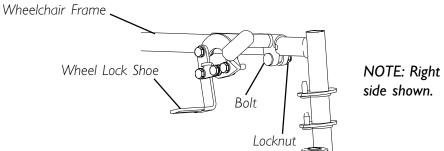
INSTALLING CLAMP-ON WHEEL LOCKS
